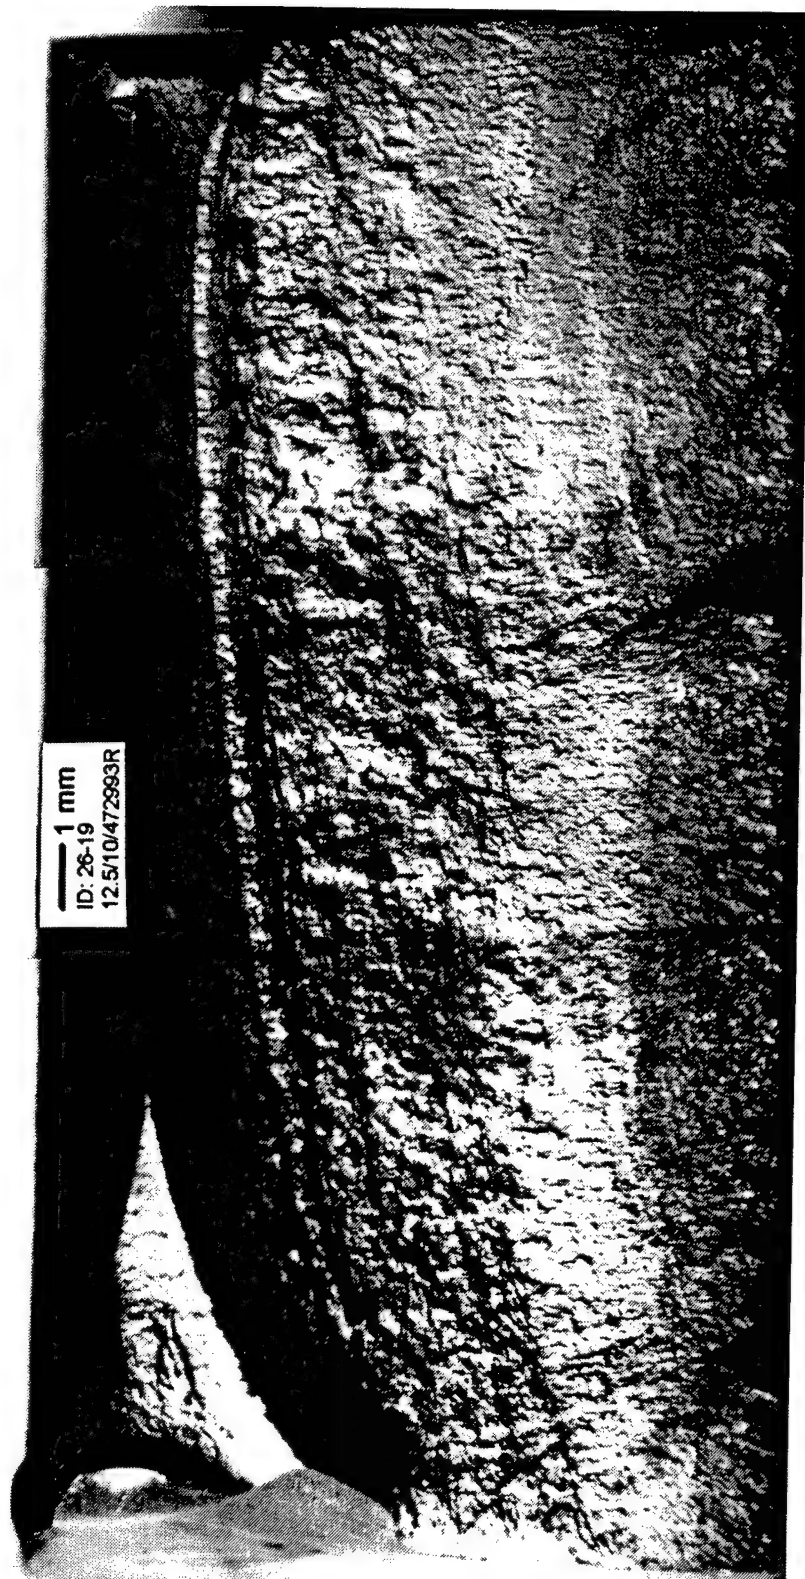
Fatigue fracture surface of the HSLA-80 but weld sample subjected to random loading:
